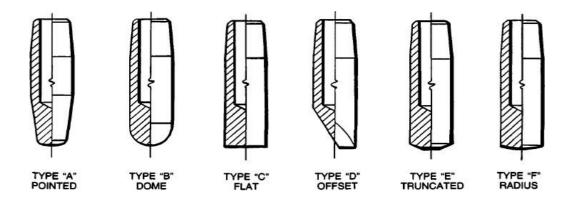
Standard spot-welding electrode nose geometries [3].
